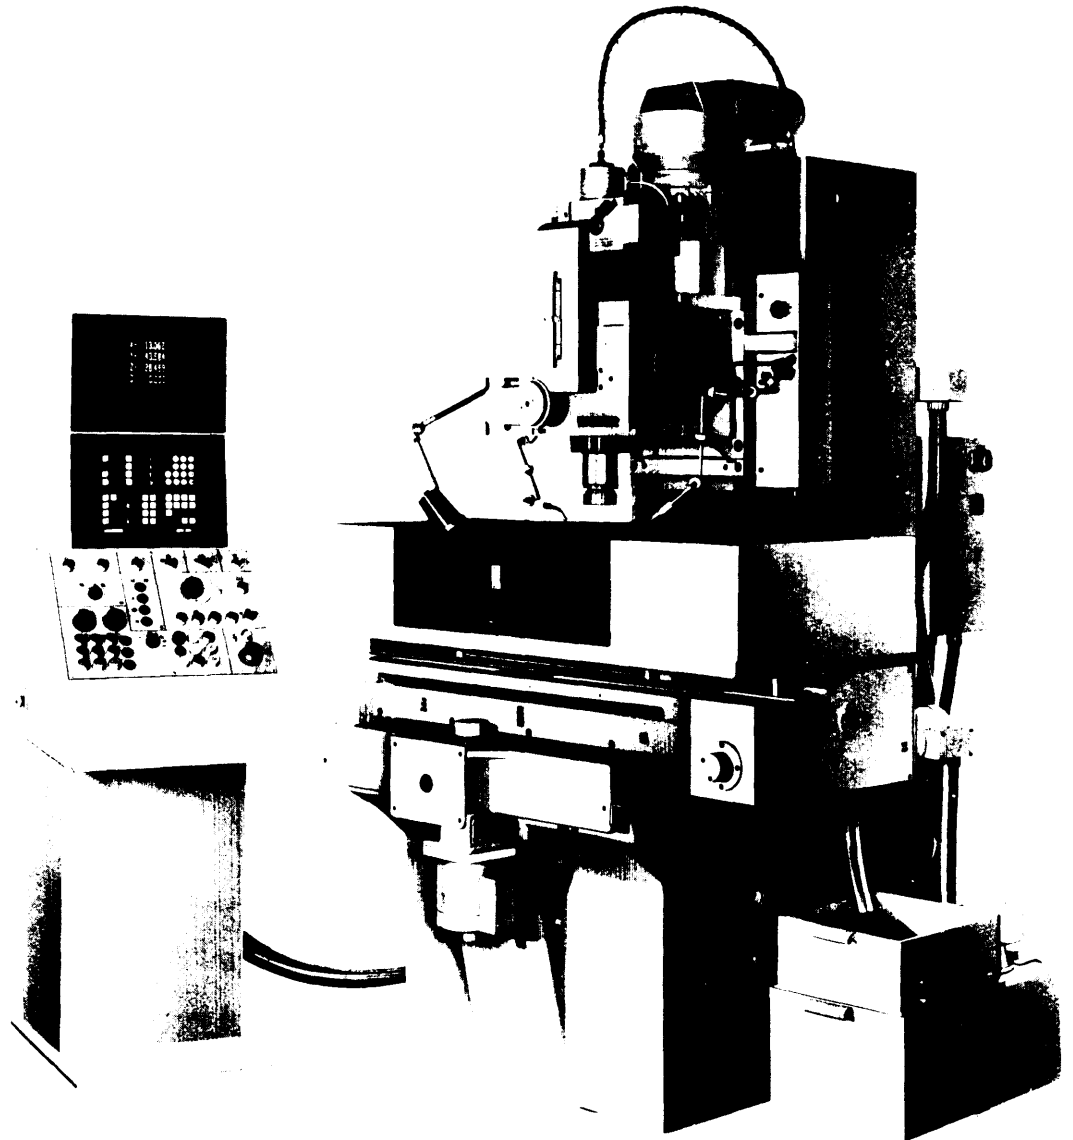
Four-axis jig boring machine, numerically controlled. (American SIP Corporation).
